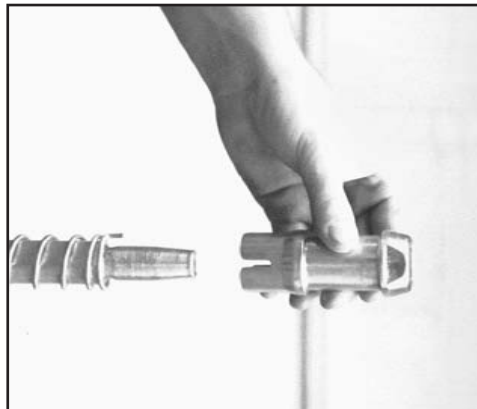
REMOVE LOCK BUSHING AND SPRING
